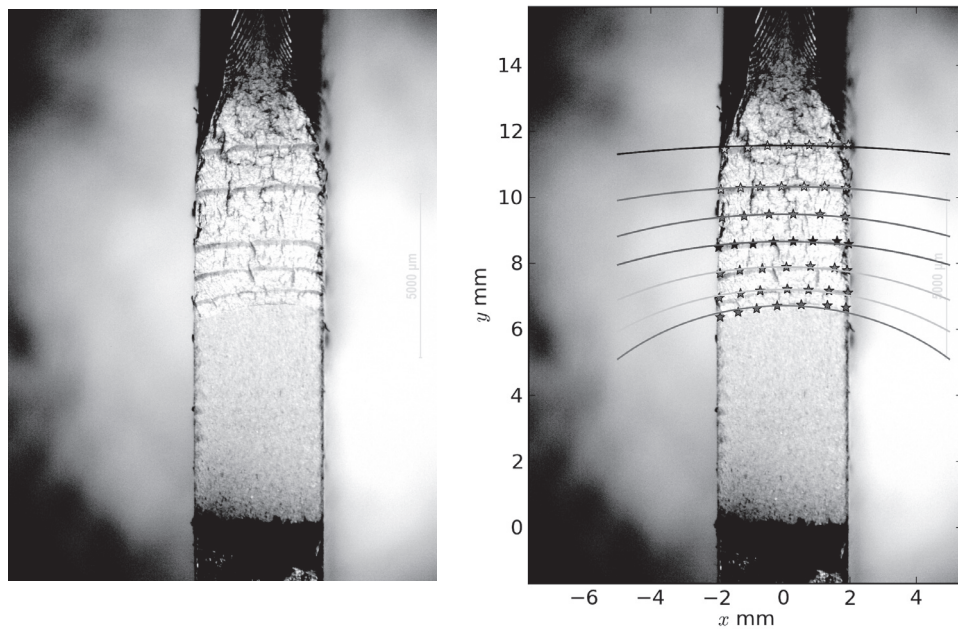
The fatigue crack surface of specimen $B=4.0$ mm, $F_{\max}=6.0$ kN.
